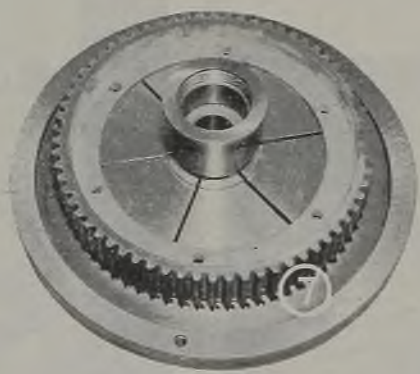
Closeup of lower die equipment for quenching large spiral bevel ring gear in Gleason press. Note radial slots for direct ing oil circulation
